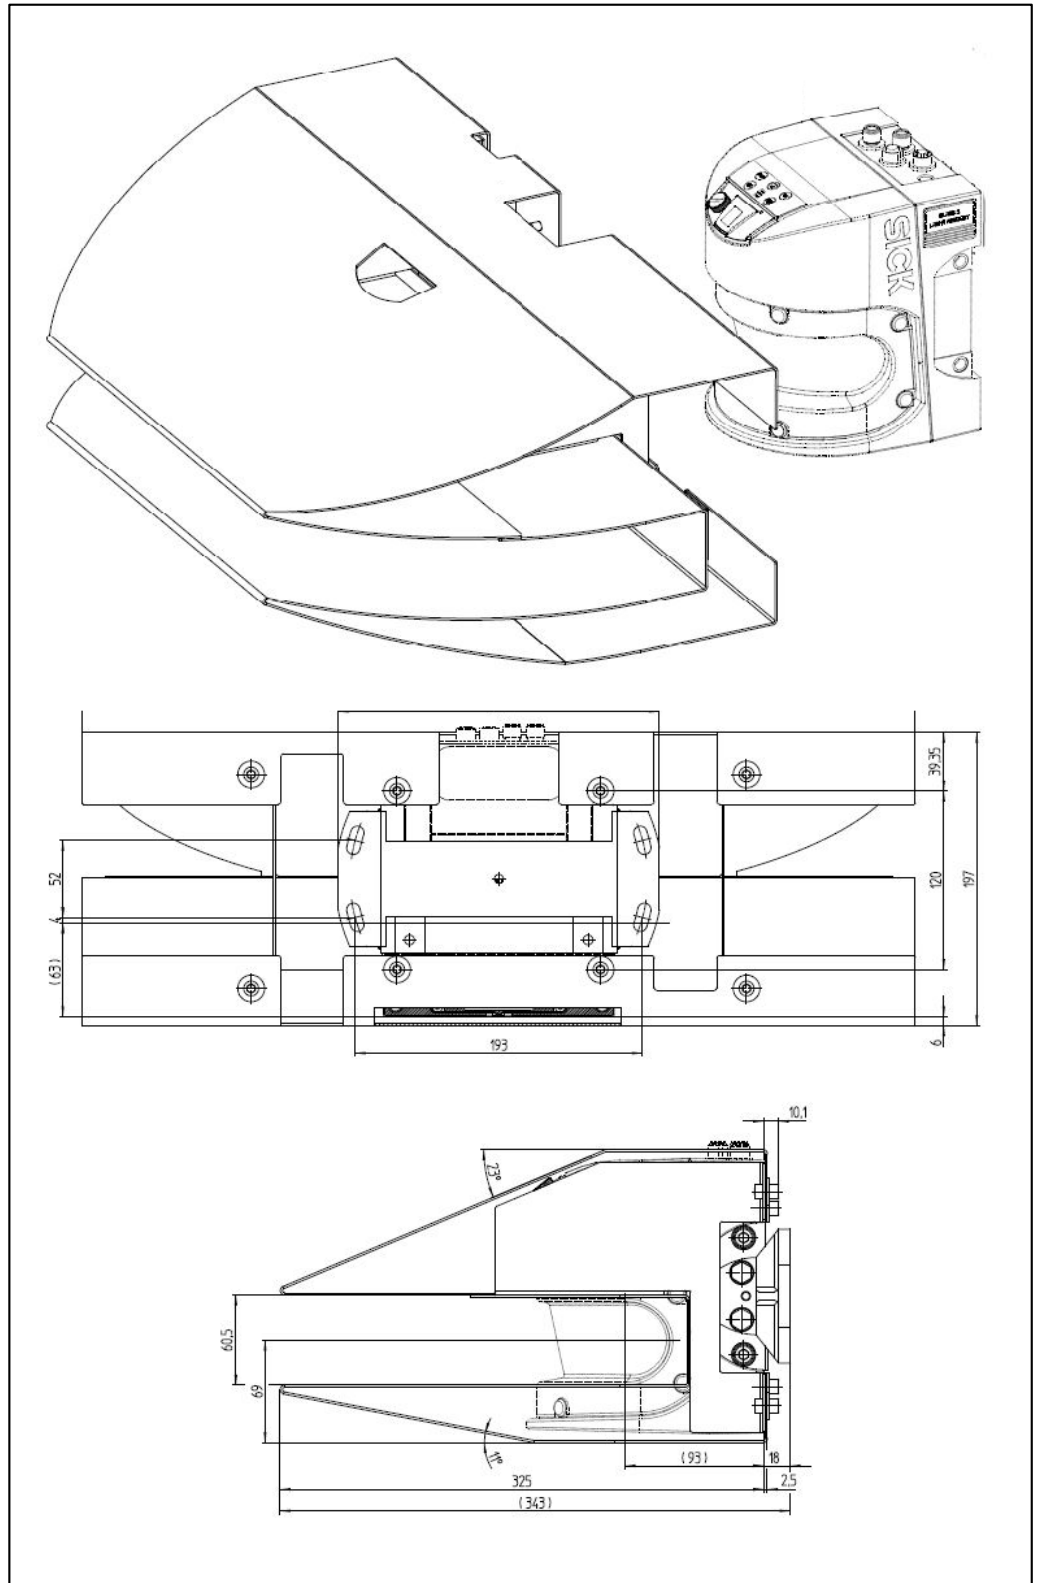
Dimensional drawings of the LMS511 laser scanner with weather hood
